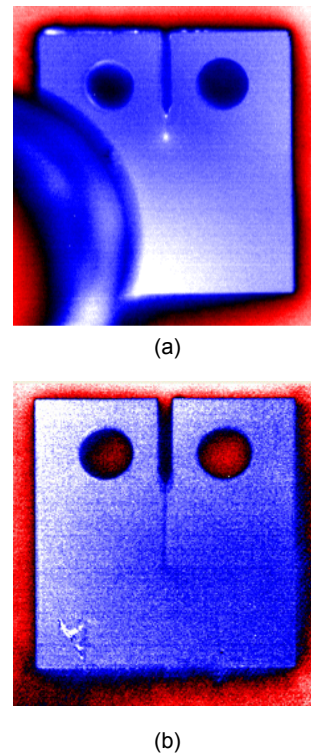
Thermography inspection result; (a) Carbon steel specimen A, (b) Carbon steel specimen B
